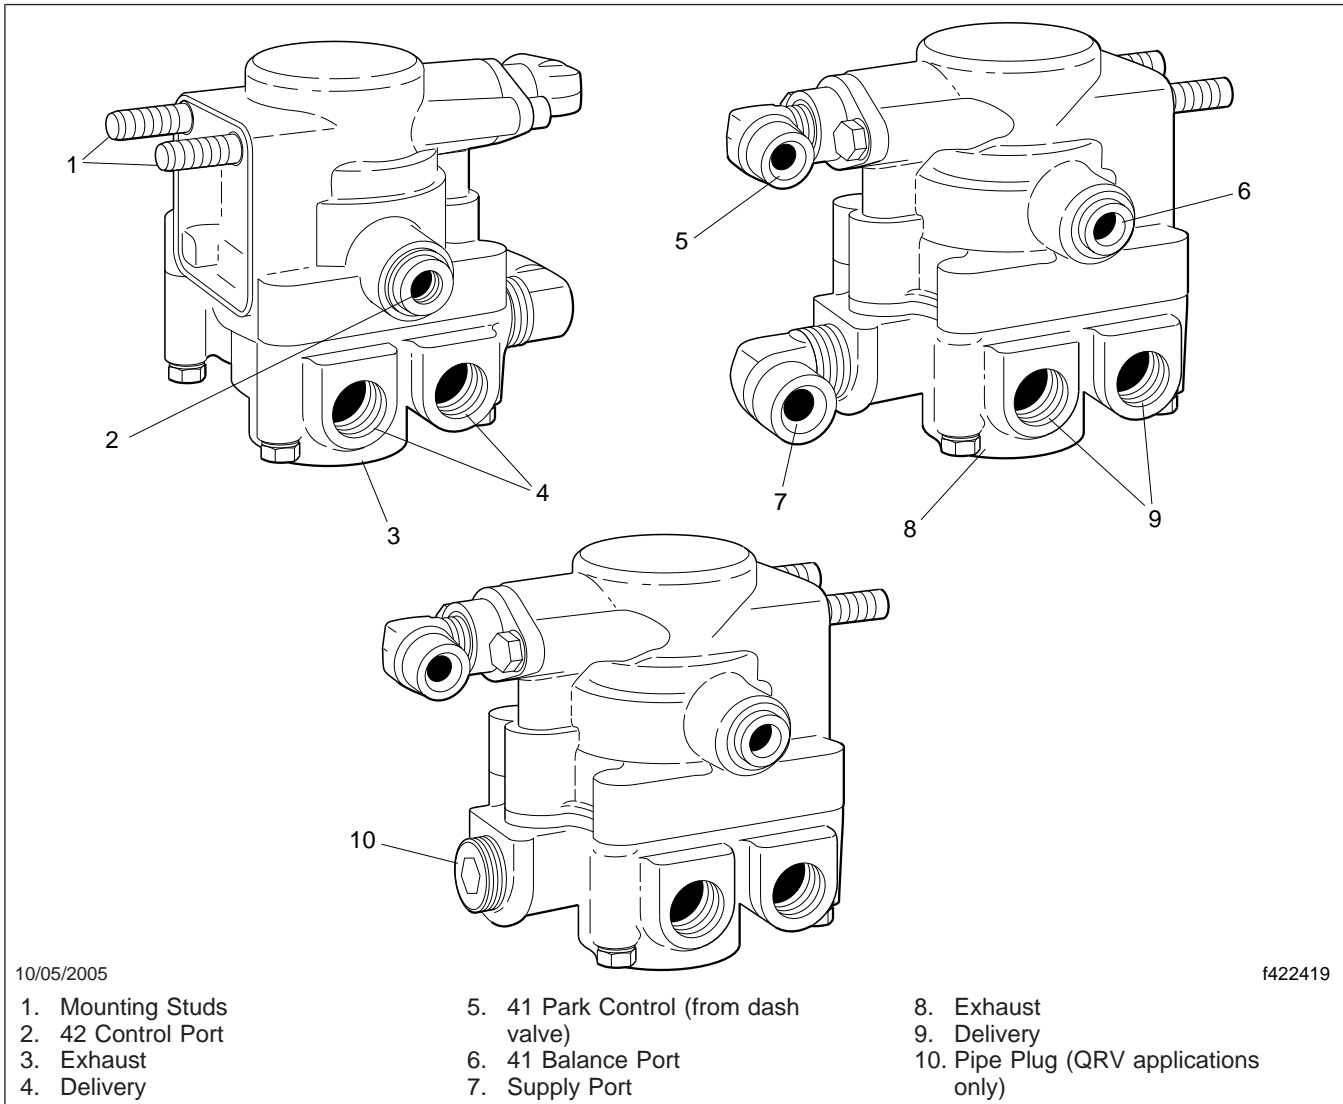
, SR-7 Spring Brake Modulating Valve (exterior views)
